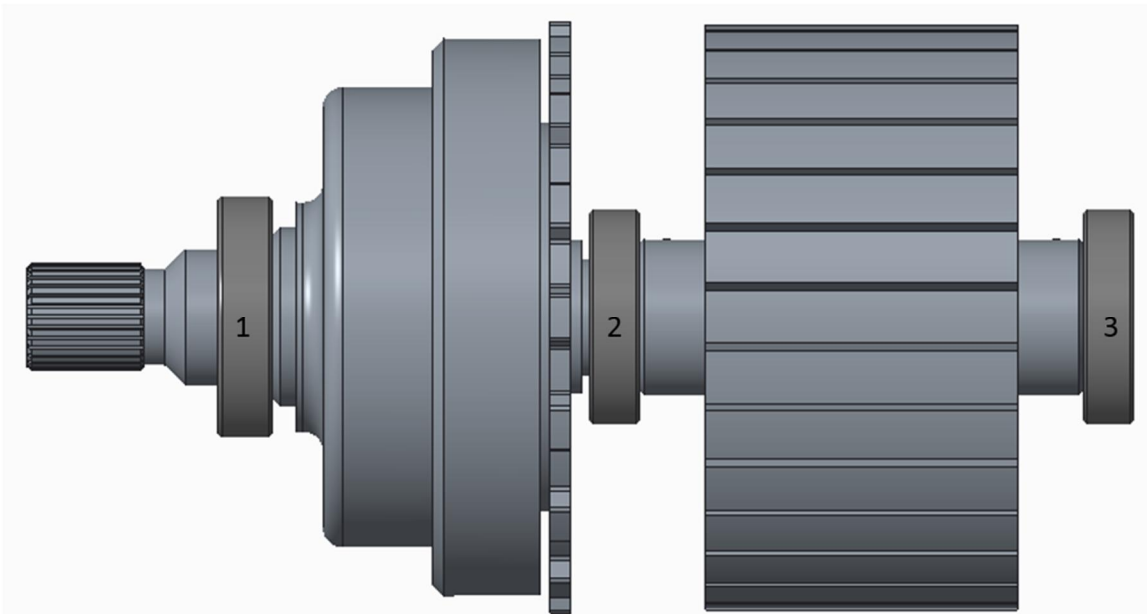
Bearing location. Planetary gear on the left and rotor on the right
